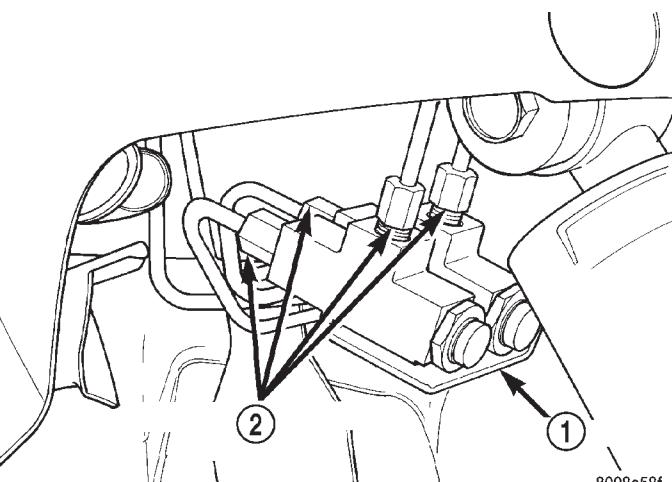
Chassis Brake Tubes At Proportioning Valve
